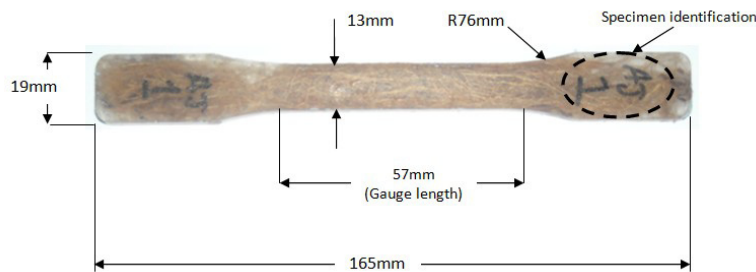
Test sample dimensions according to standard ASTM D638 Type I
